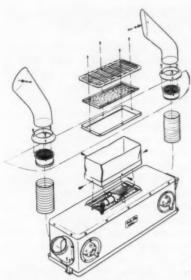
Exploded view shows duct connections and cooling case assembly of 1956 "Executive" model.
